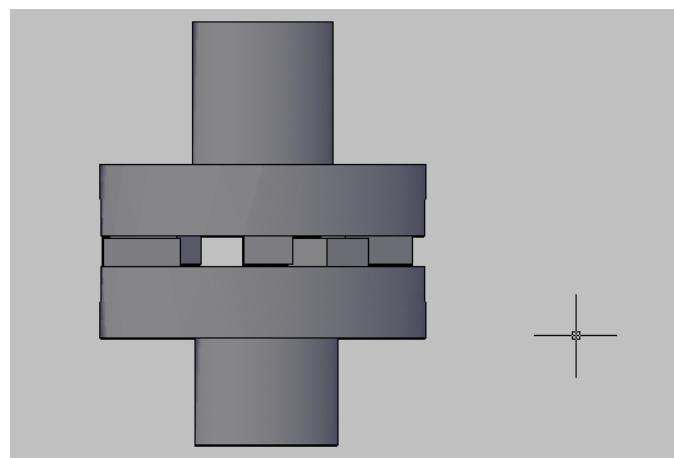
Belt in Top View of the setup (dimension is in inches)
